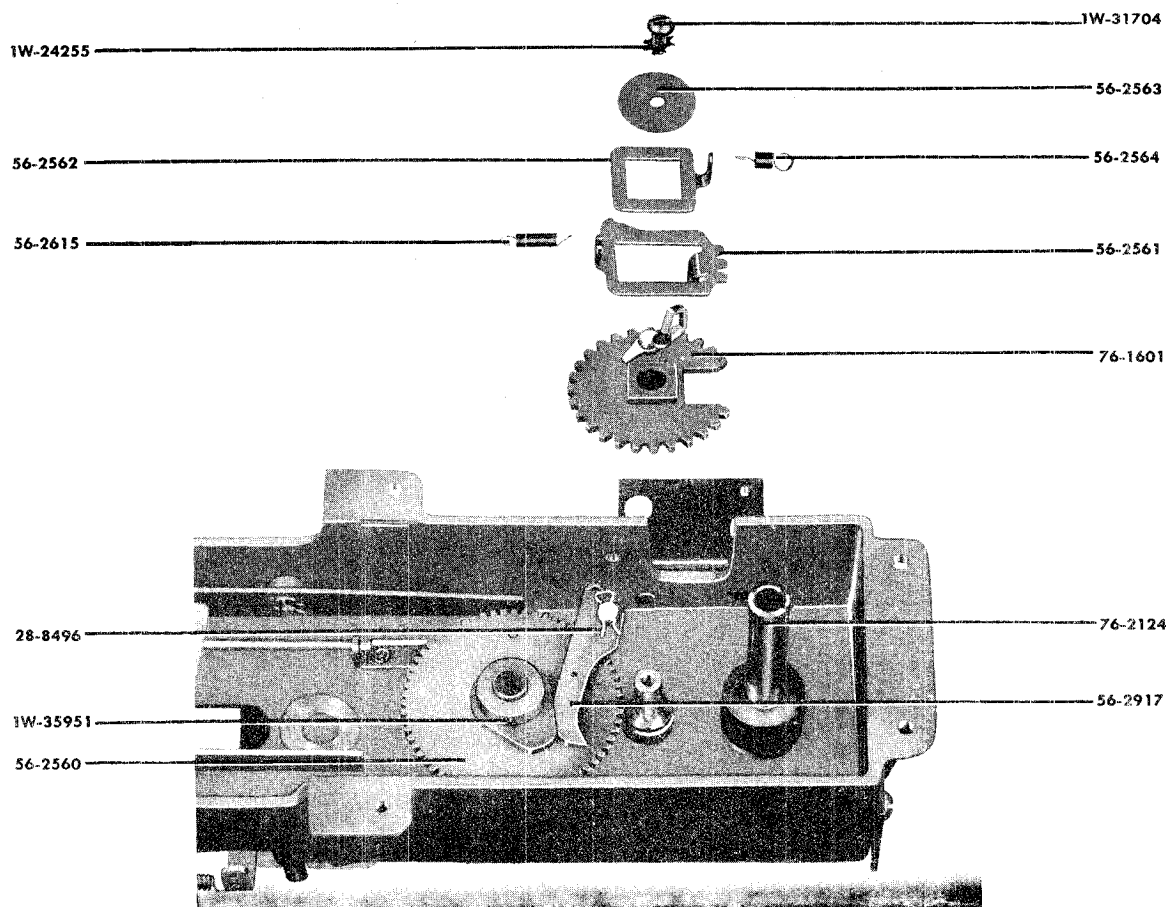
CHANGER MECHANISM, DISASSEMBLY OF INTERMEDIATE GEAR.
